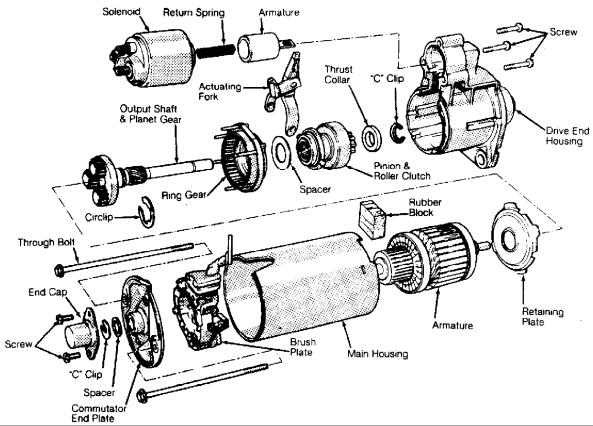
Exploded View of Bosch Reduction Gear Starter Courtesy of Ford Motor Co.
